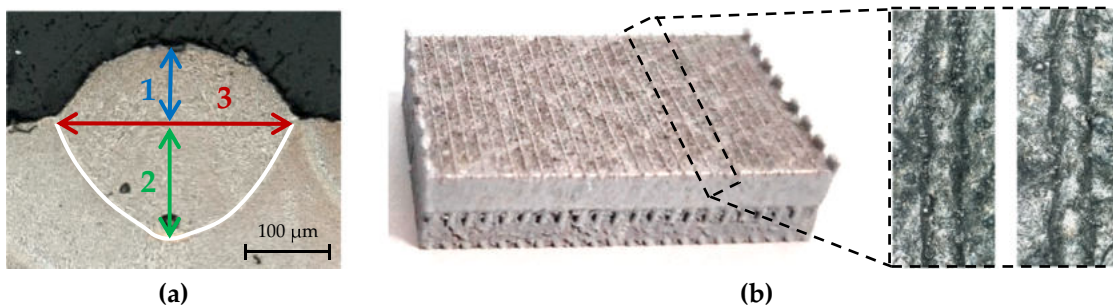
(a) Measured geometrical parameters of the single-track welds; (b) the single-track sample.
